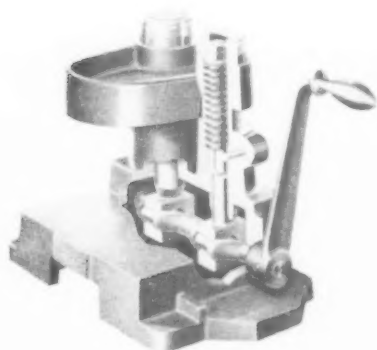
shows a standard L Type Swartz fixture, here set up to drill the flange holes in engine manifolds. Note the fixture lock at right, in the base.
